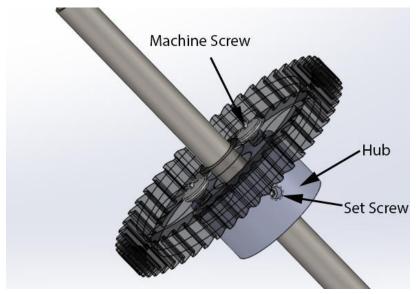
Gear attached to shaft via a hub. Gear shown transparent for clarity
